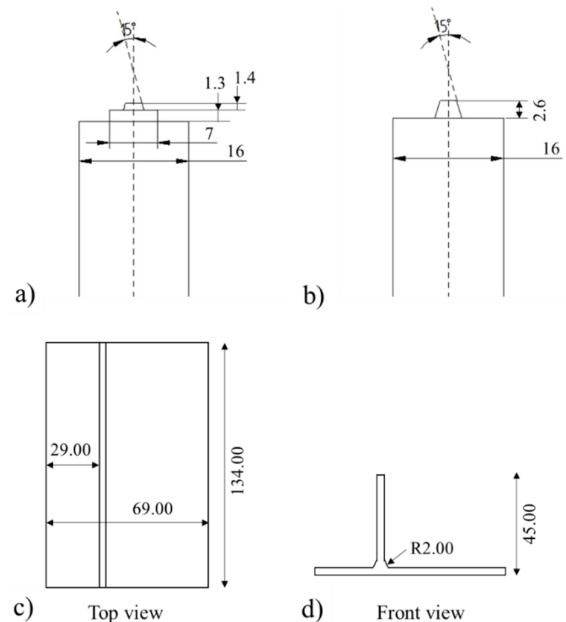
Dimensions in millimeters for tools (a) with double shoulder, (b) without double shoulder and (c-d) for the final T-joint
